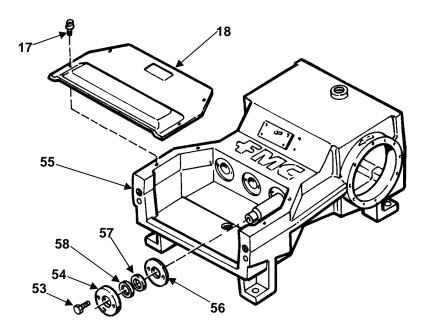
High Pressure Pump (Drive End Seals) (Sheet 2 of 2).
